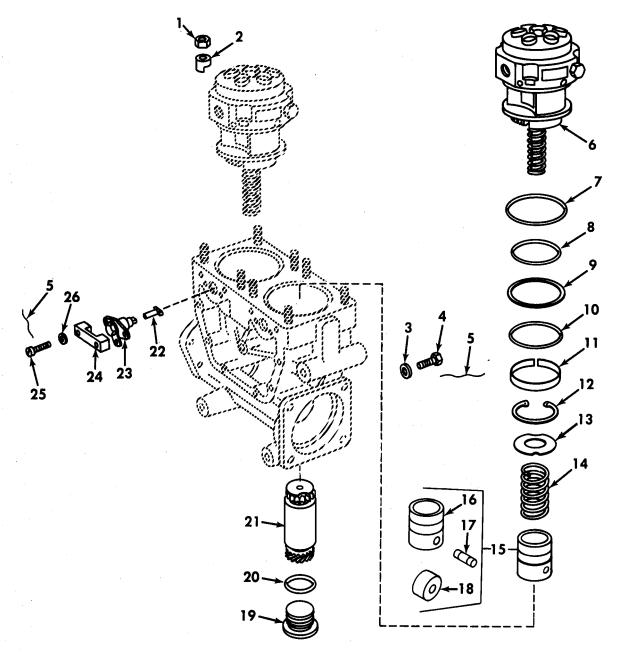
Head Assembly, Tappet Assembly, Gear Shaft Assembly, Control Unit Assembly, and Associated Parts.
